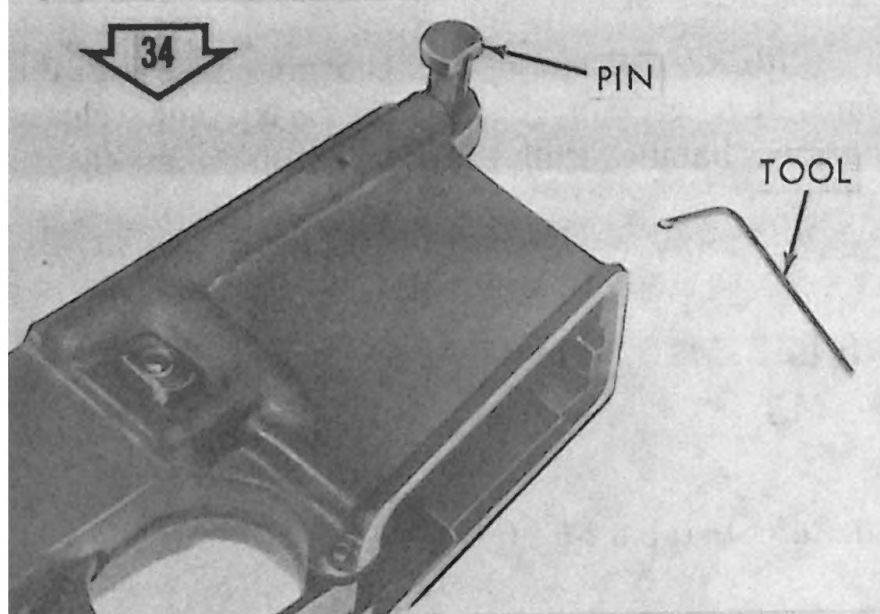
Disassembly/assembly of rifle. (7 of 8)
